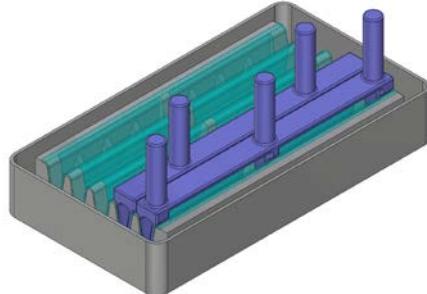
Filter Tool 3 Removal & Insert into 5th slot
